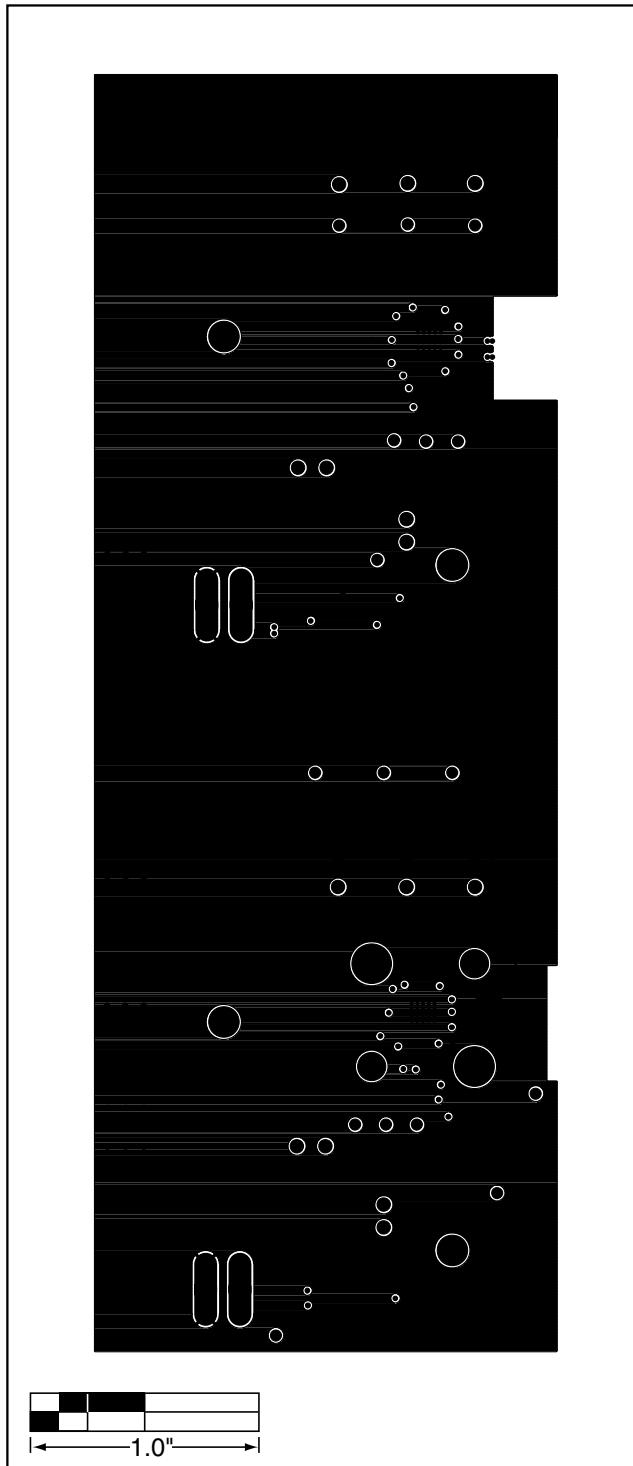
MAX3850 EV Kit PC Board Layout—Ground Plane
